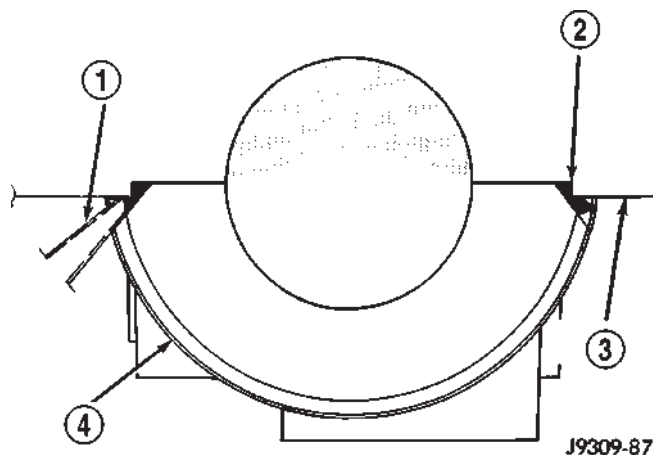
Apply Sealant to Bearing Cap-to-Block Joint
